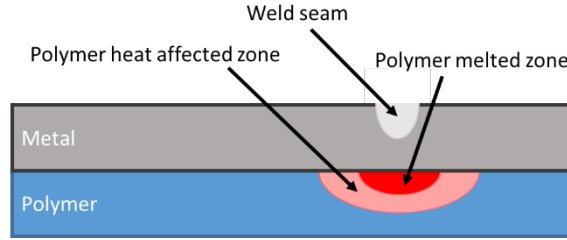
Scheme of the polymer melted and heat affected zone after laser welding.
